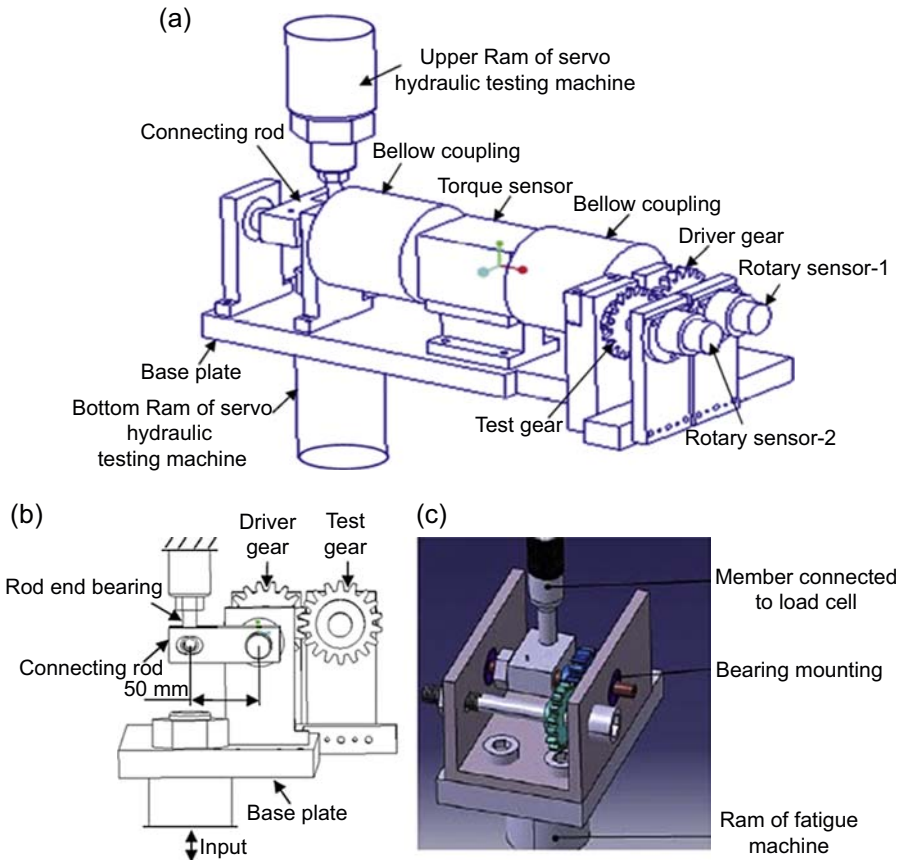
(a) Configuration of test rig. (b) Polymer gear fixation unit. (c) Mechanism layout of test rig.
